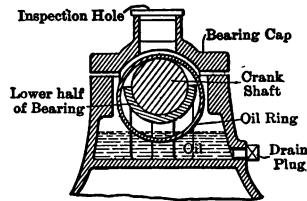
Lubrication of Main Bearing by Means of Ring.
